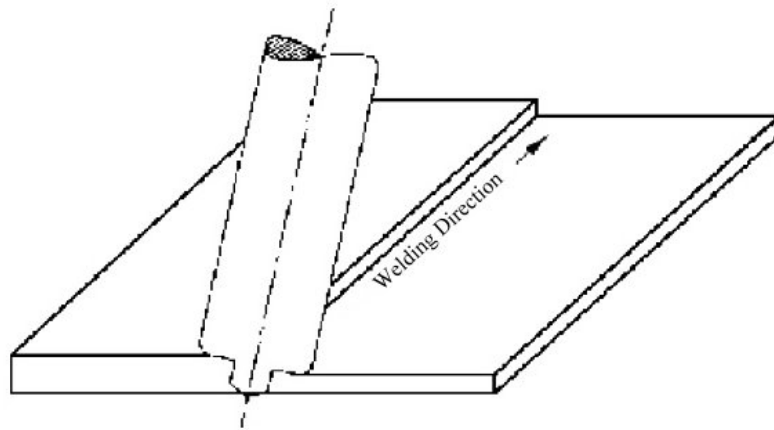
Schematic showing FSW of tailor blanks with dissimilar sheet thickness using a tilted tool. Source: Kalle S. and Mistry A. (1999). *Proceedings of the First International Symposium -n Friction Stir Welding*, June 14–16 1999, Thousand Oaks, California.
